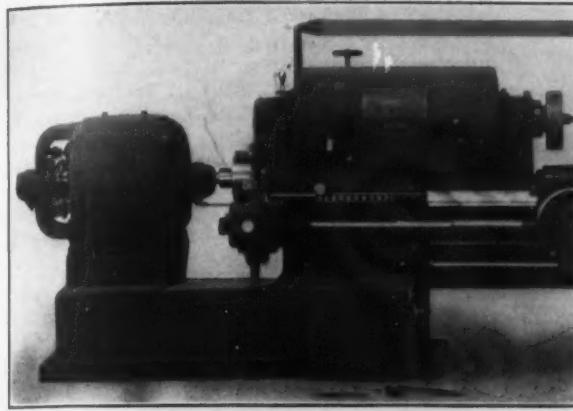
Fully Inclosed Gears of 24-in. Headstock.
